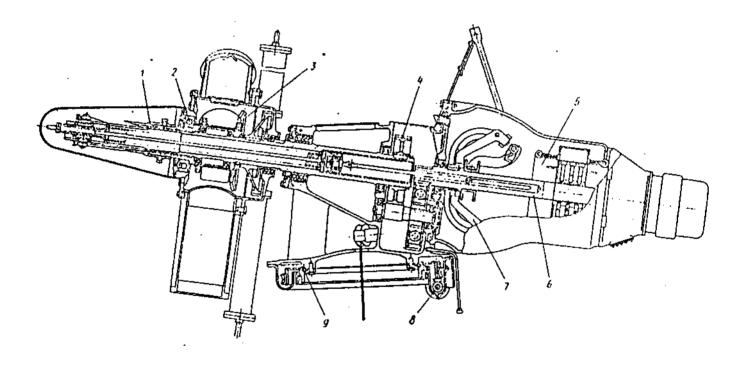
Head of the "Sokol" machine: 1. main shaft; 2. bearing; 3. gear; 4. reduction gear; 5. generator; 6. generator shaft; 7. centrifugal regulator; 8. orientation mechanism; 9. support bearing.
